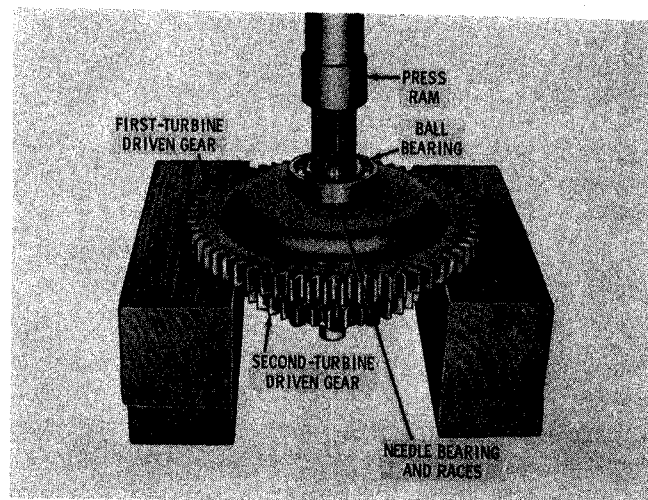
Pressing second-turbine driven gear from freewheel unit
